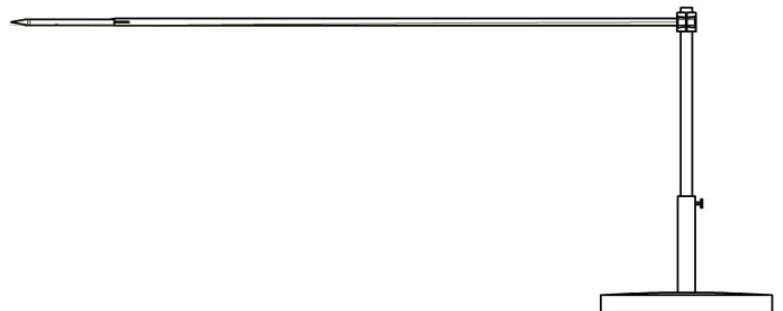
Mounting on extended pipe fixation using pipe adapter Type 6550A20
